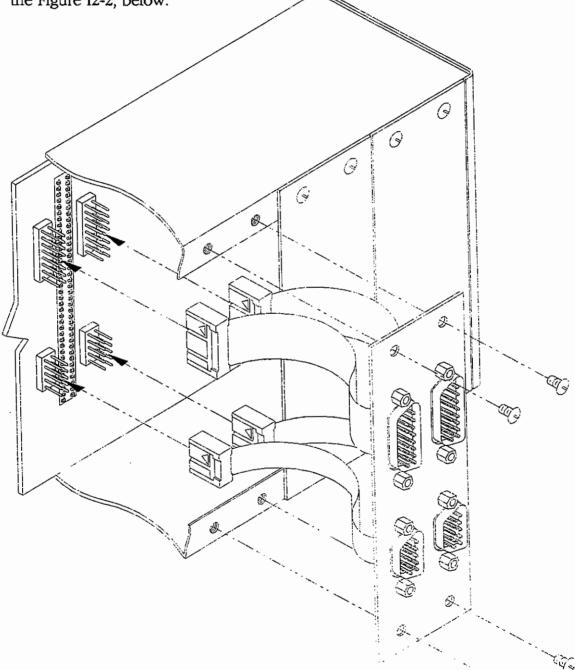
CCI-22 Interface Rear Cable Assembly Panel
